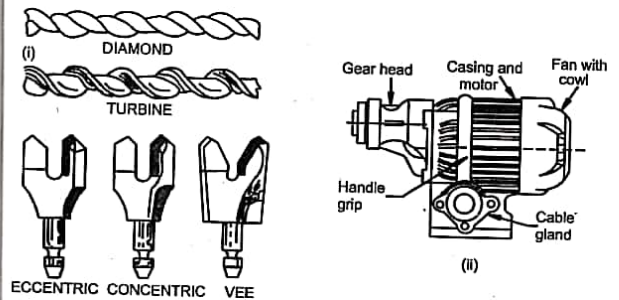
(i) Drill rods for rotary drill (ii) An electric coal drill
